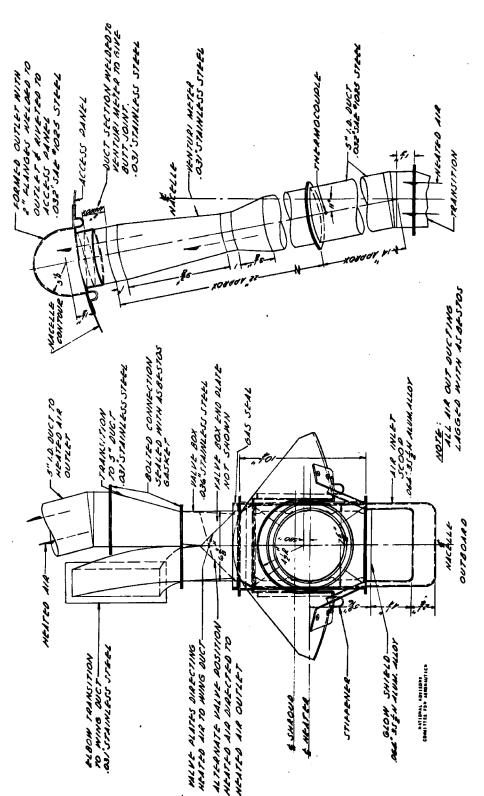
FINAL INSTALLATION OF HEAT EXCHANGER 3 IN 4, FRONT VIEW, B-17F AIRPLANE. MACELLE
